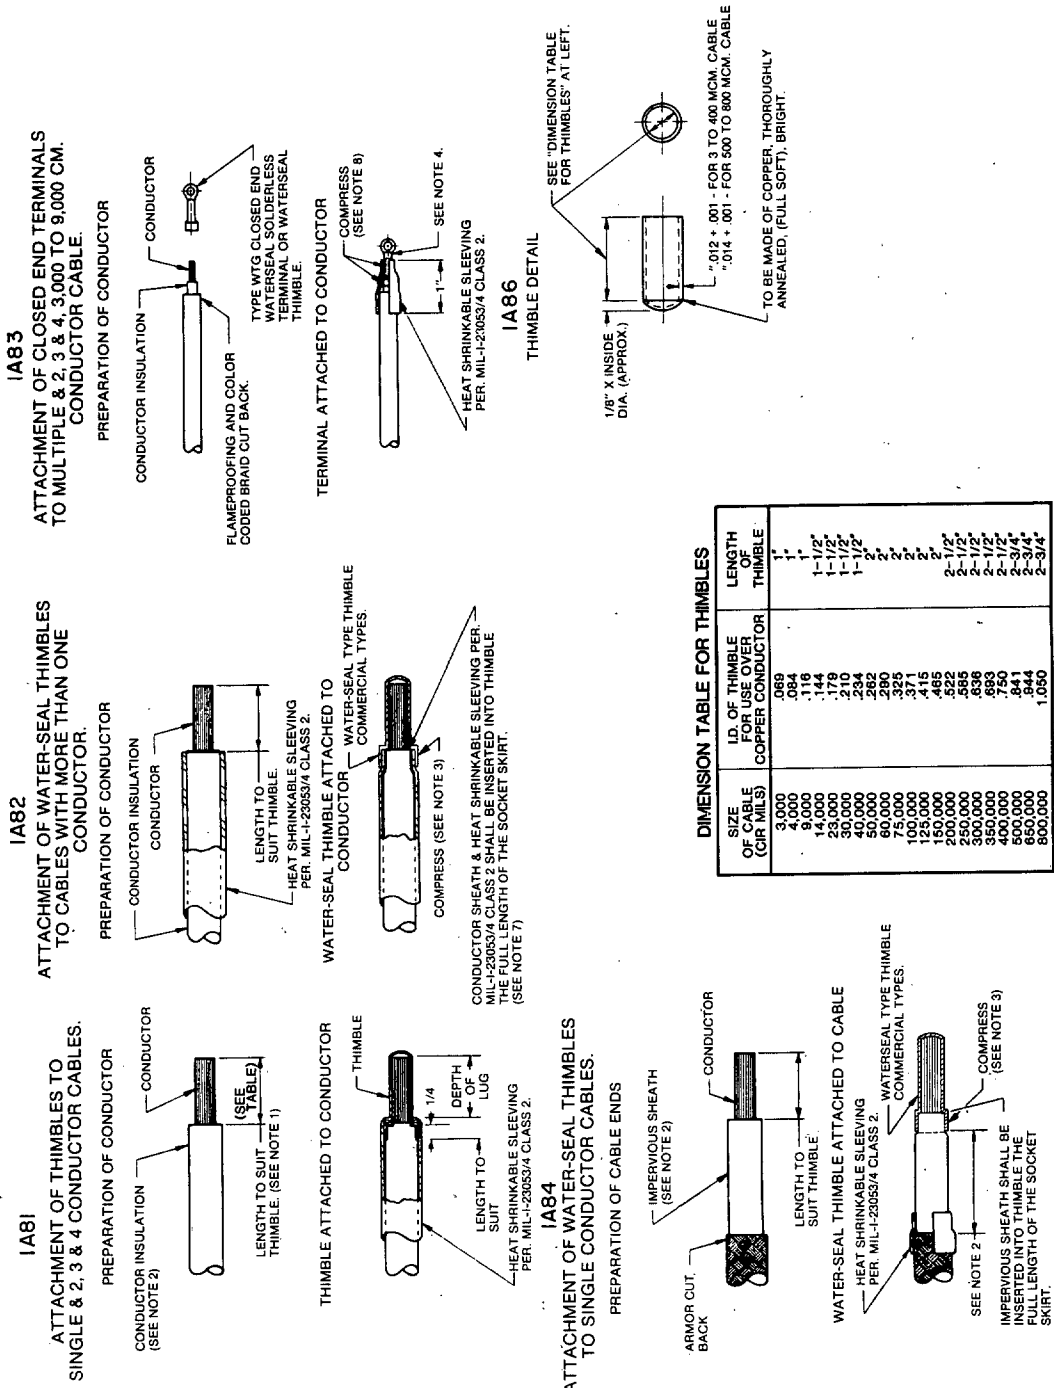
A8. Cable end sealing with heat shrinkable tubing.
